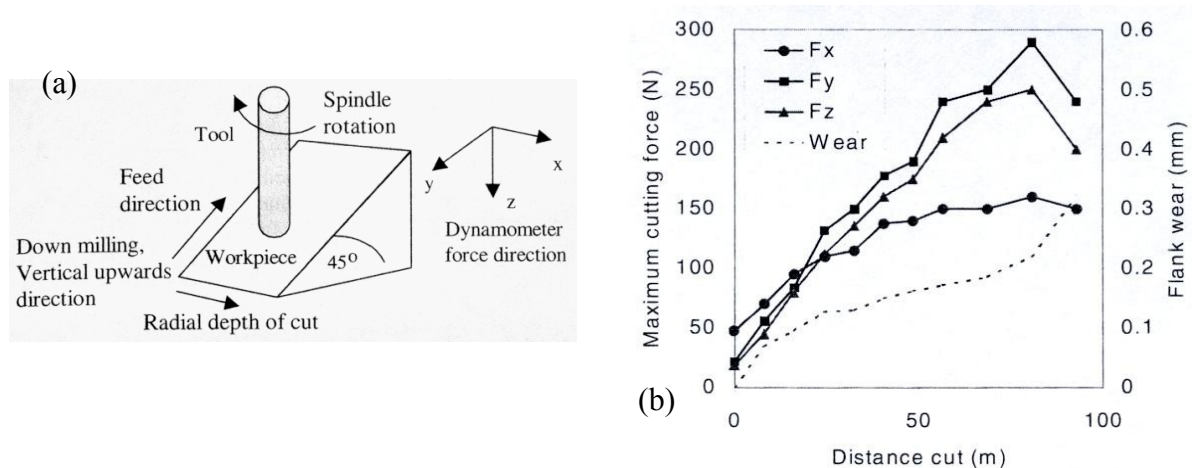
Cutting force when ball nose end milling Ti-45Al-2Mn-2Nb +0.8%vol. TiB₂ (a) schematic of the cutting process and force directions, (b) cutting force and flank wear with increasing distance cut [104]
